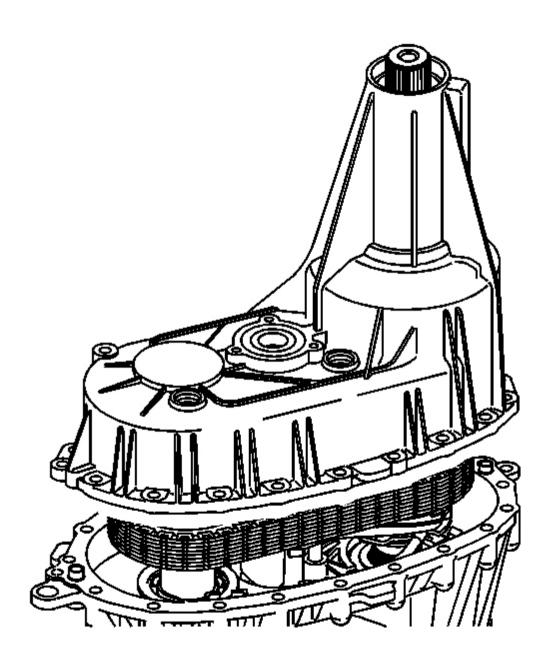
Rear Case Half Courtesy of GENERAL MOTORS CORP.
